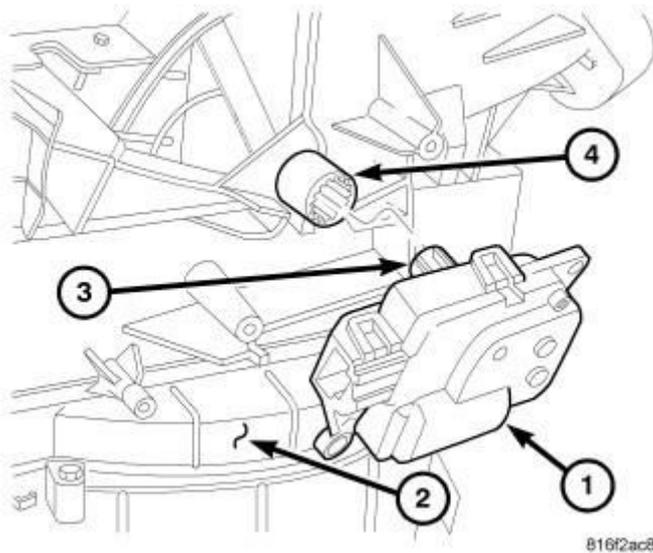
Recirculation Door Actuator, HVAC Air Inlet Housing, Actuator Output Shaft & Recirculation Door Pivot Shaft Adapter
